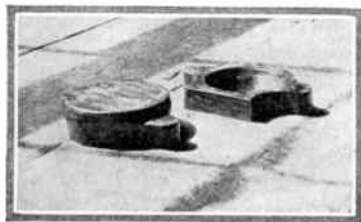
Front cylinder collar and rear collar which combines with it the cylinder head
